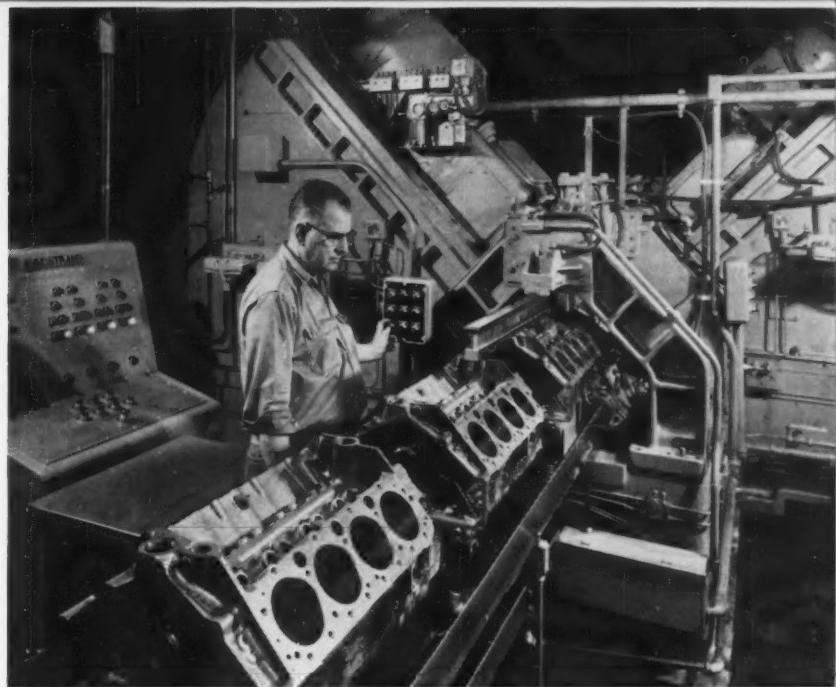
Miscellaneous holes in V-8 engine block are drilled and various surfaces are milled on this thirteen-station transfer machine.
